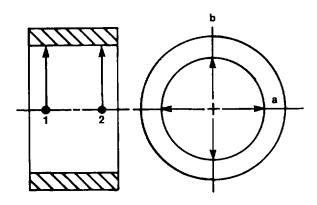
Measuring Piston Pin Bushing Connecting Rod Bearing Bore
